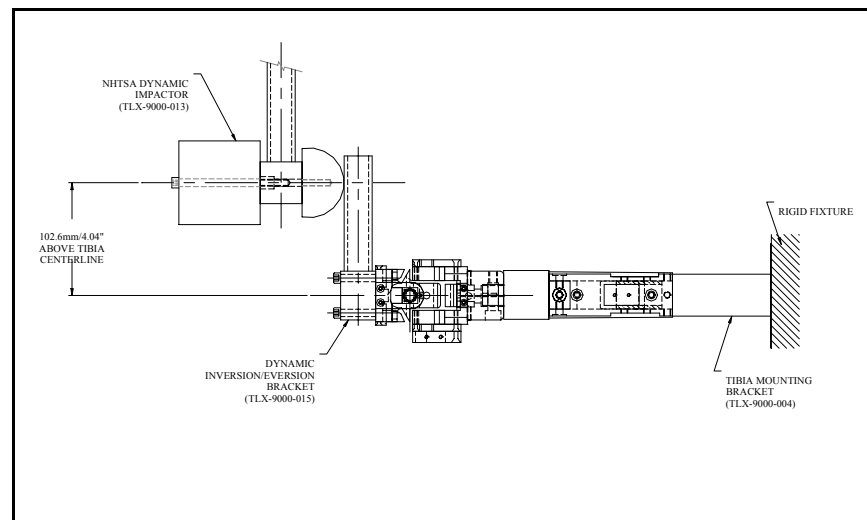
Setup of pendulum fixture for dynamic inversion/ eversion test.
